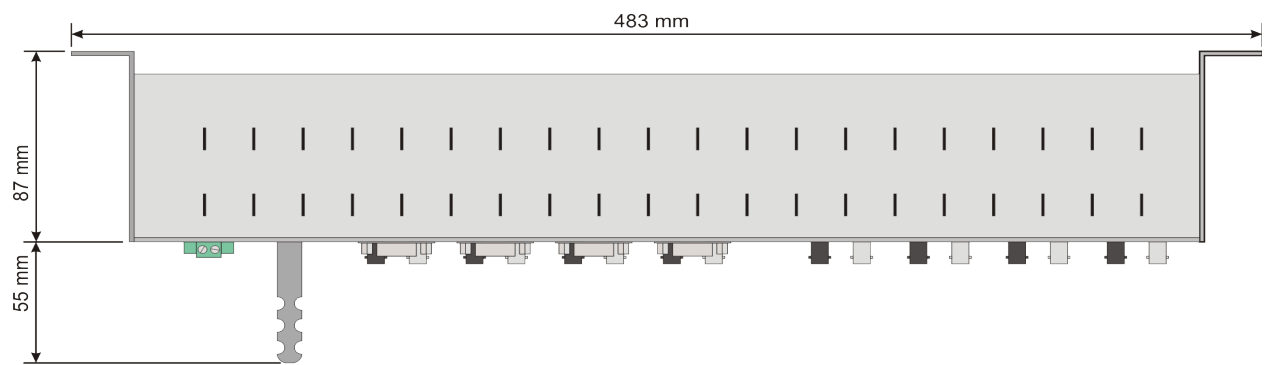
Dimensions top side - 19" rack mount deepened for 35 mm
